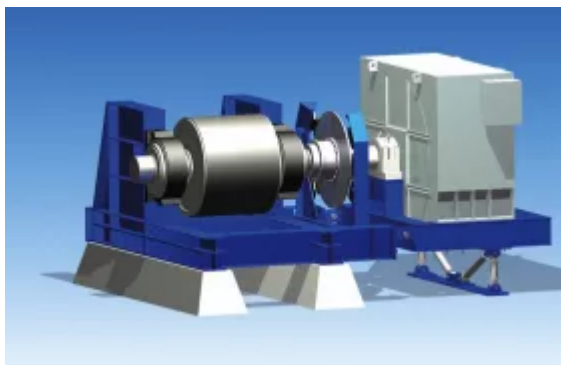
Motor with separate bearing, flexible coupling, brake disc, drive pulley and the patent-pending support structure. (Picture: © Takraf)
